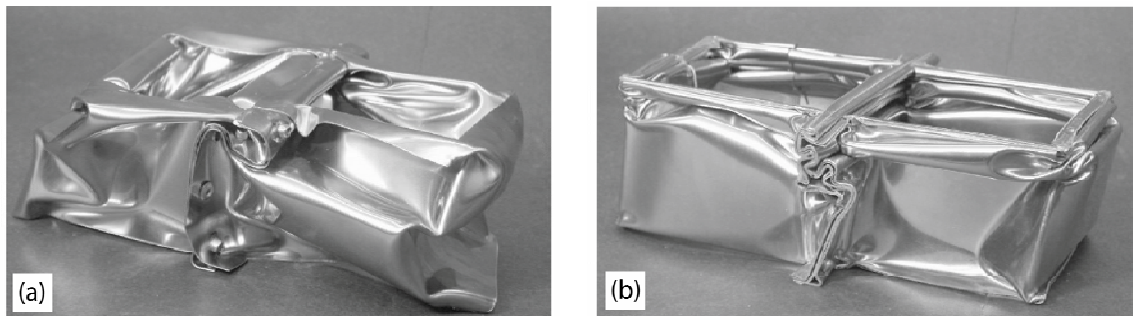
Deformed double-cell columns after crushing: (a) solid section of stainless steel sheets, and (b) flocked and glued (FG) sheets. Both columns had similar dimensions and were crushed over the same distance [43].
